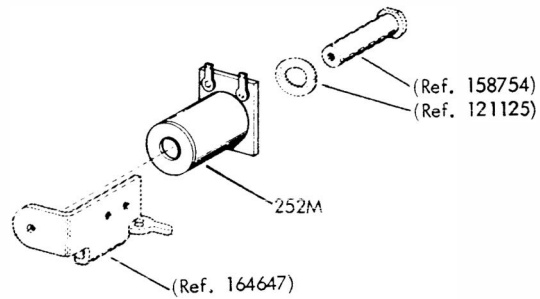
SIGNAL GENERATOR MAGNET ASSEMBLY (LK and LAK)
